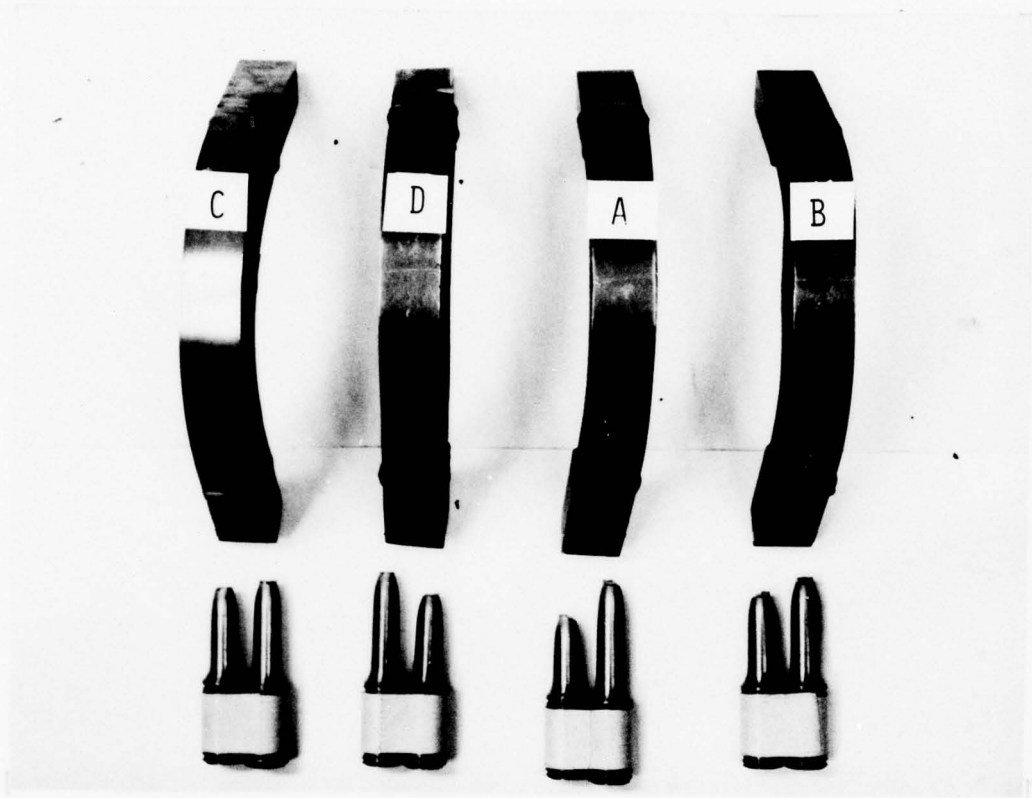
TENSILE SPECIMENS AFTER BEND TESTING
